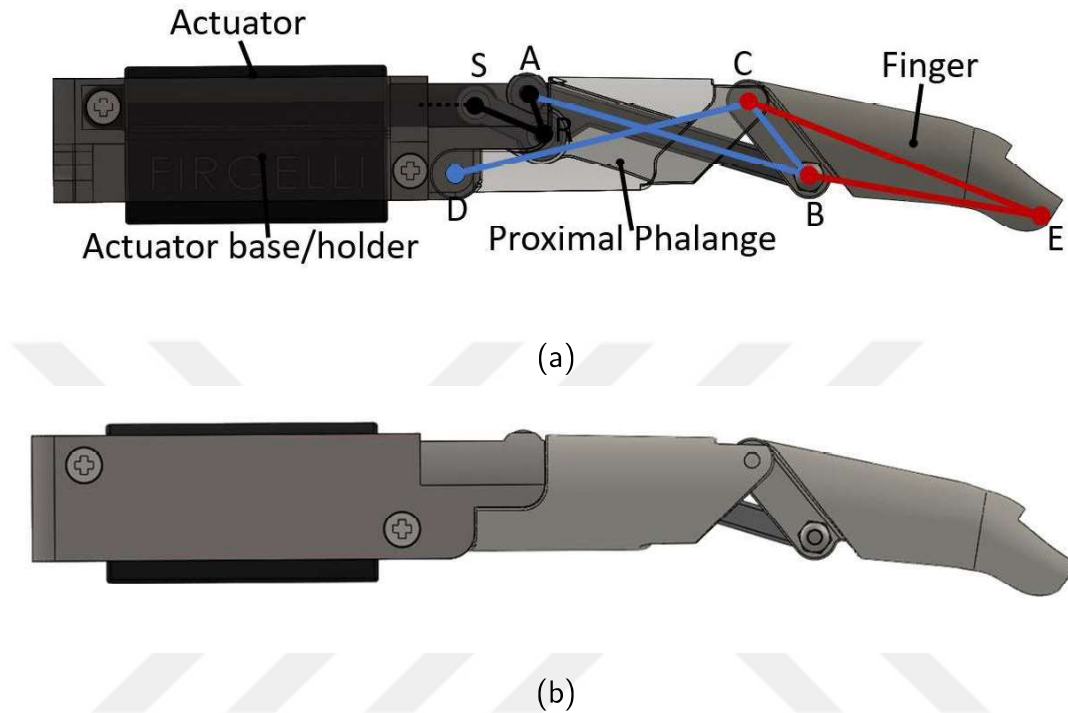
The finger assembly, (a) The four bar and slider crank mechanism is shown on the top of the finger assembly. (b) The complete finger assembly.
